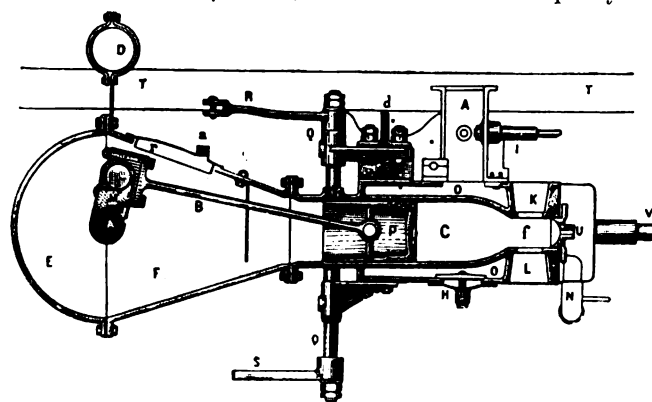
SECTION OF DE DIETRICH MOTOR.
